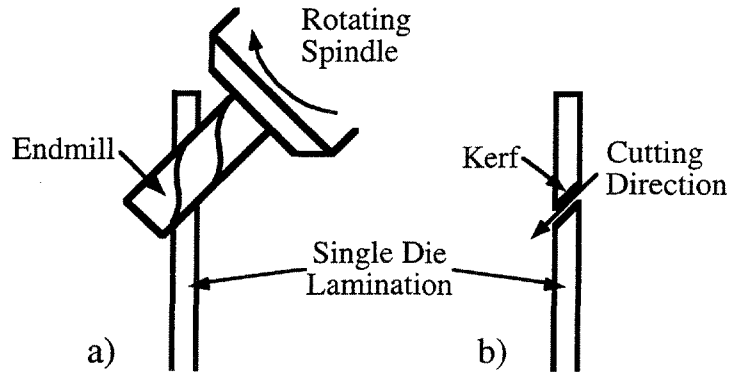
Cutting bevels into die laminations by a) flute-edge endmilling and b) by unconventional machining methods.
